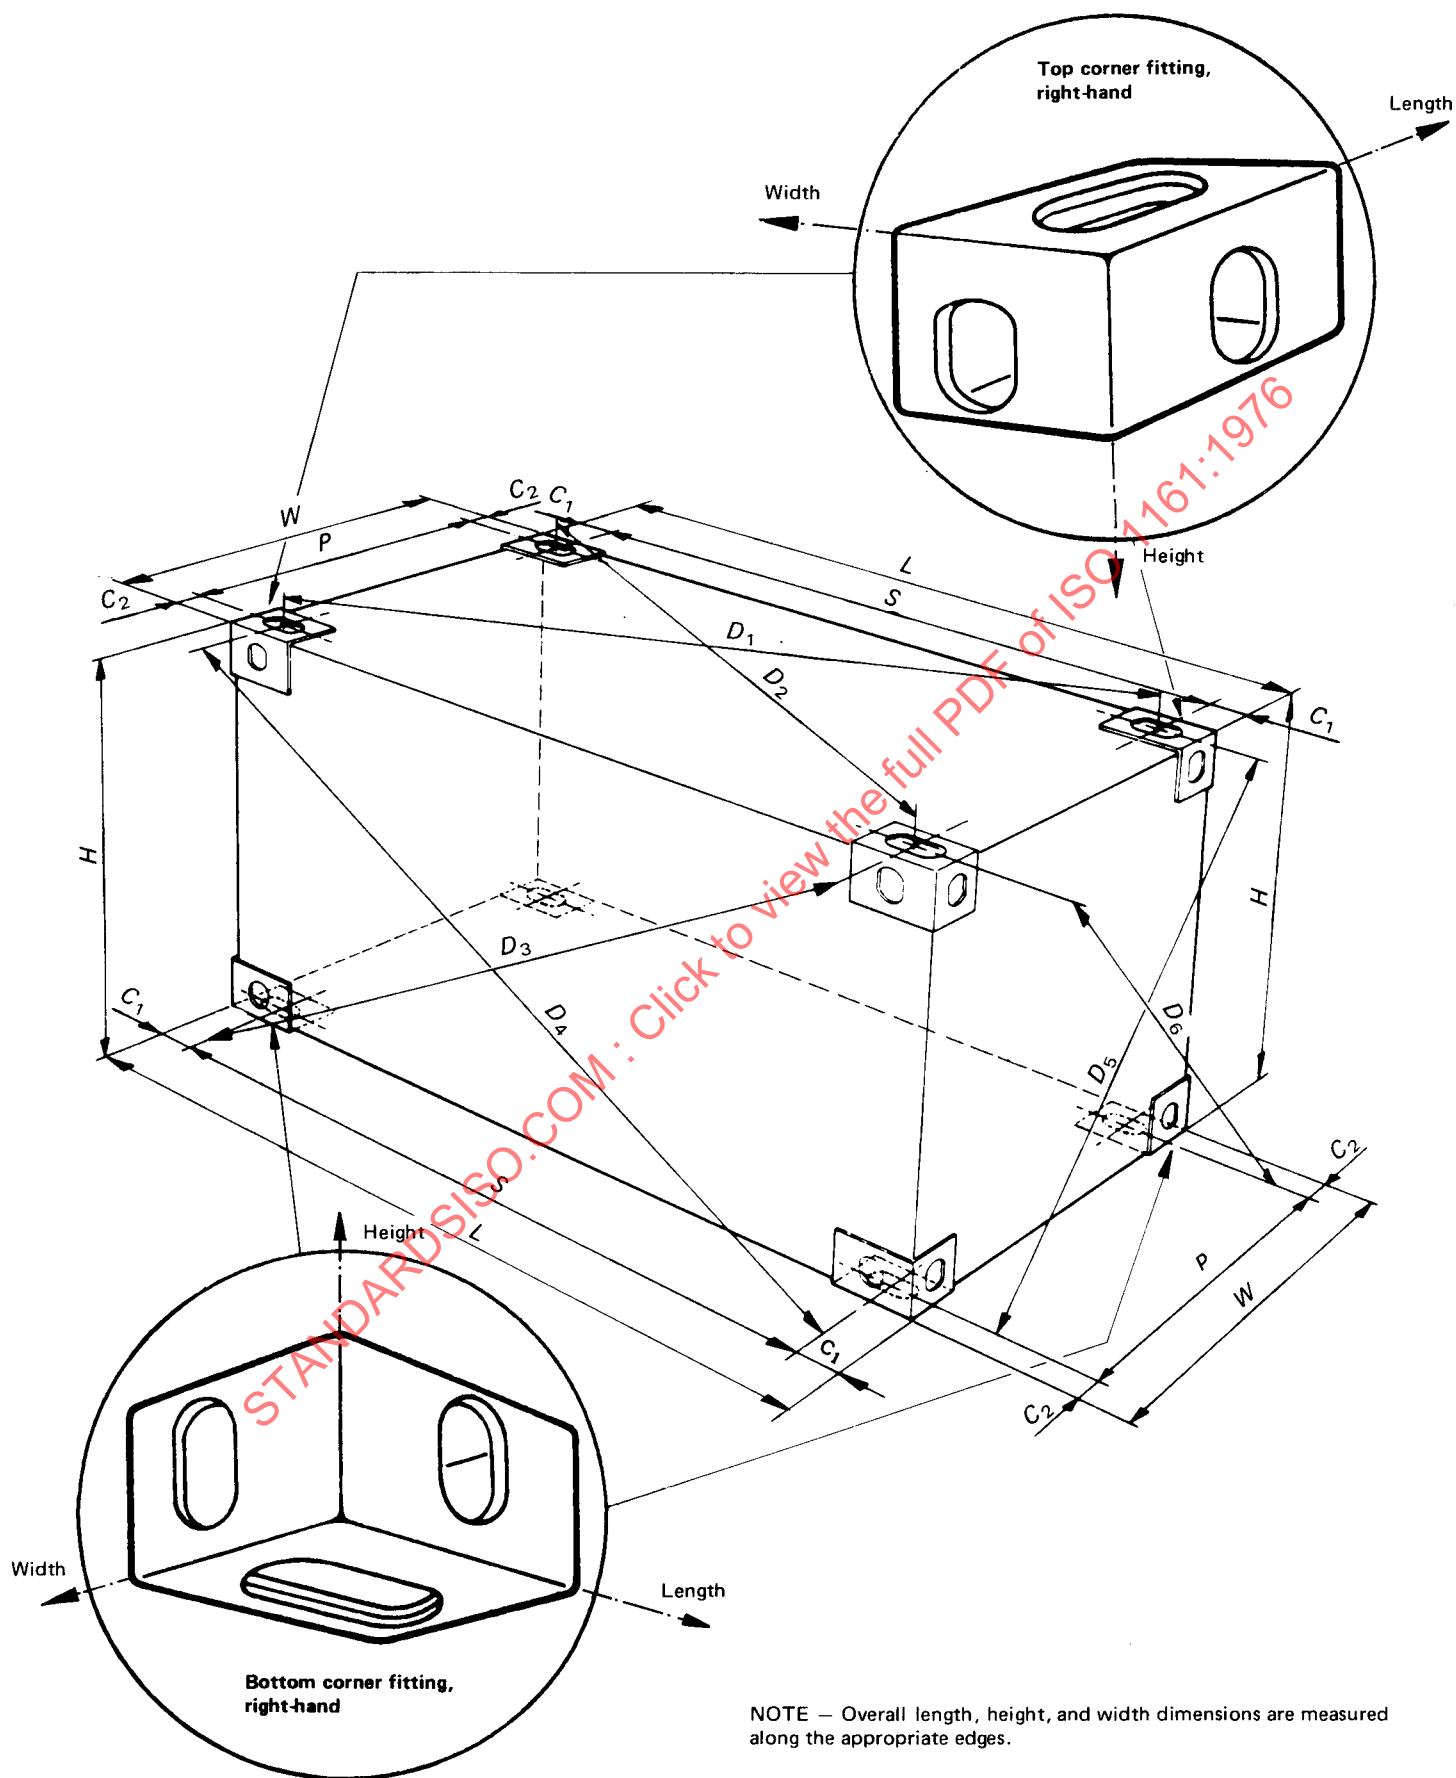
Assembled corner fittings – Diagonal tolerances
